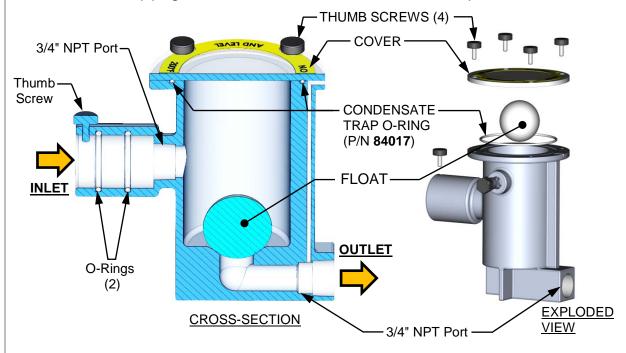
External Condensate Trap – Cross-Section & Exploded View
